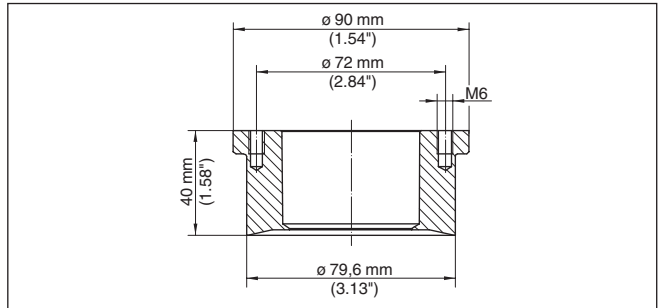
Dimensions of welded socket, hygienic fitting DN 32 with tension flange
